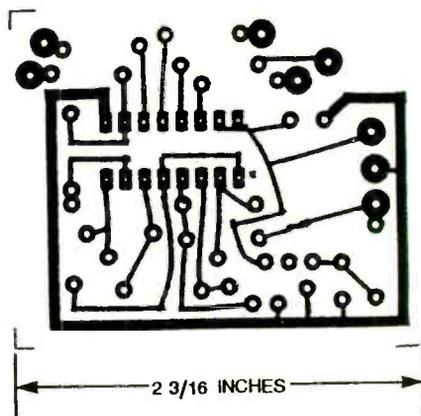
The project was assembled on a small printed-circuit board measuring about 2 by 2½ inches. A printed-circuit board is available from the source specified in the Parts List.
